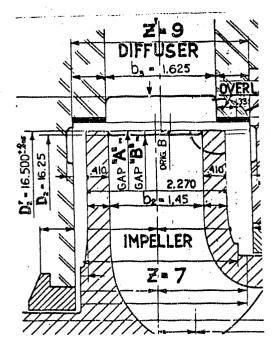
Misaligned rotor toward outboard. Gap "A" ineffective on suction side. Thrust reversal at low flows. Thrust bearing will fail on the unloaded side.
